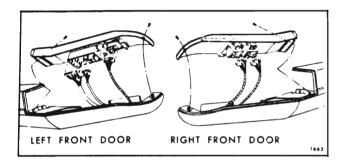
Front Door Arm Rest Switch Cover Assembly -Olds. Style Shown, Others Typical
